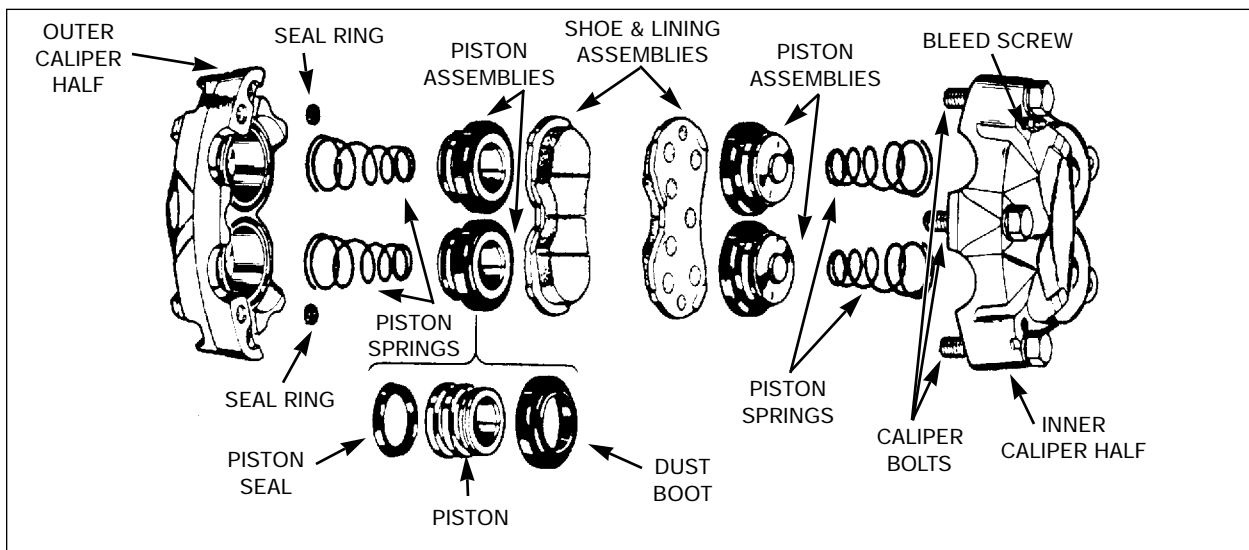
Two-piece disc brake caliper, using four pistons. (Bendix)
